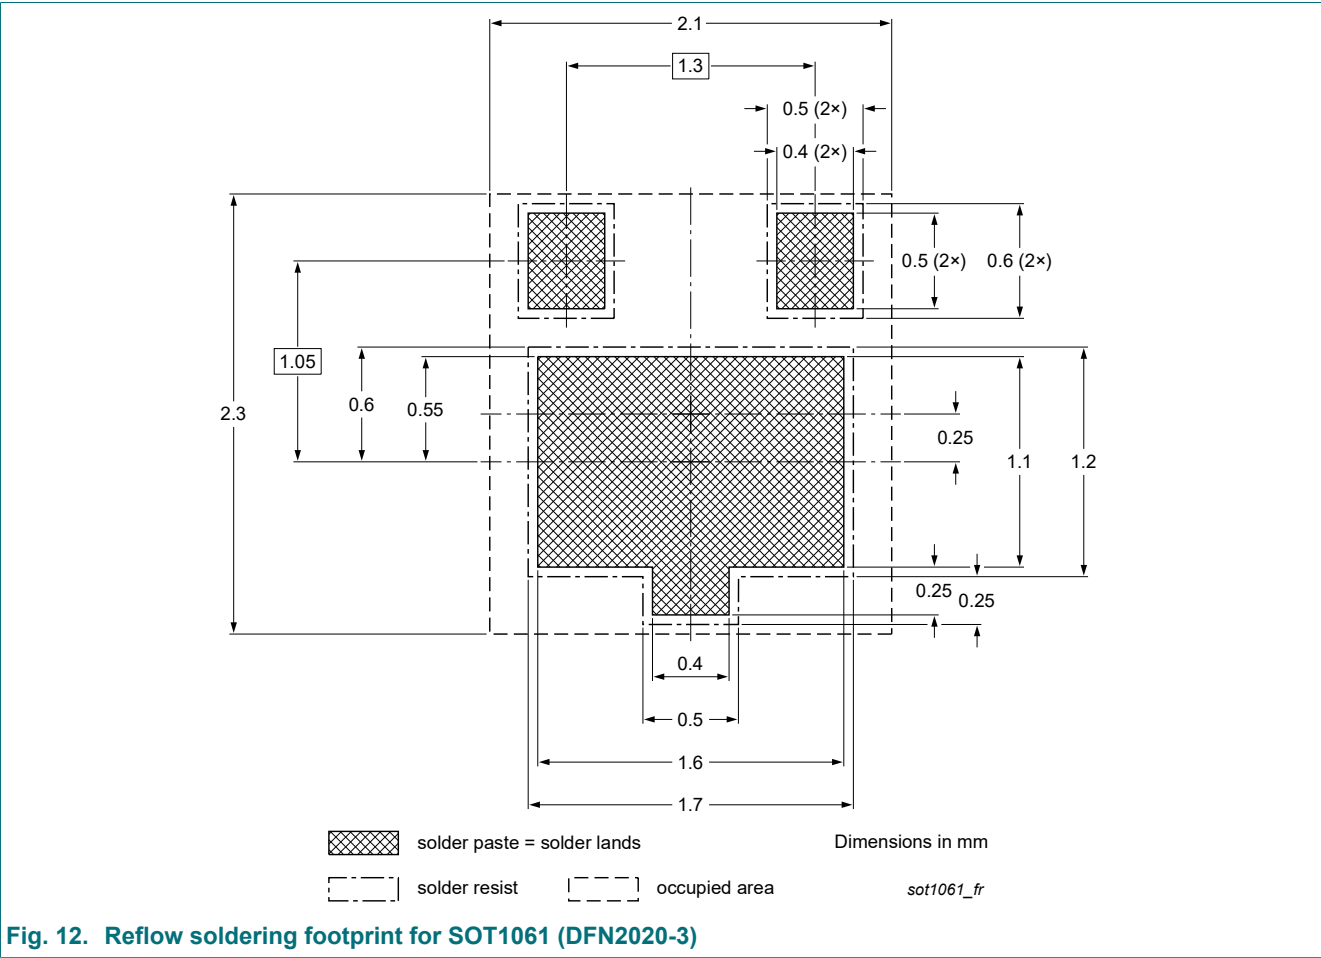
Reflow soldering footprint for SOT1061 (DFN2020-3)
